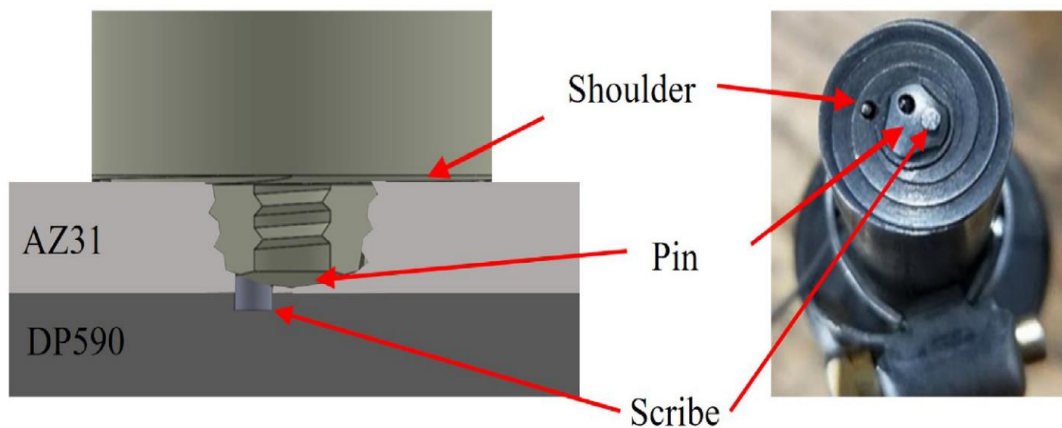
(a) Schematic view of FaST setup, (b) Scribe Tool Table
